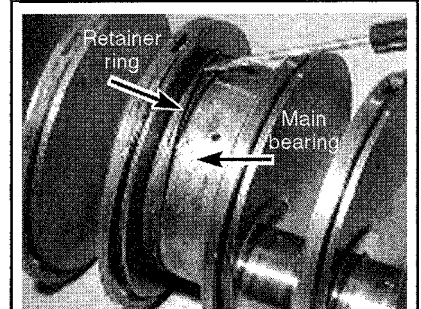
To remove the main bearings, carefully lift off the retaining ring...
